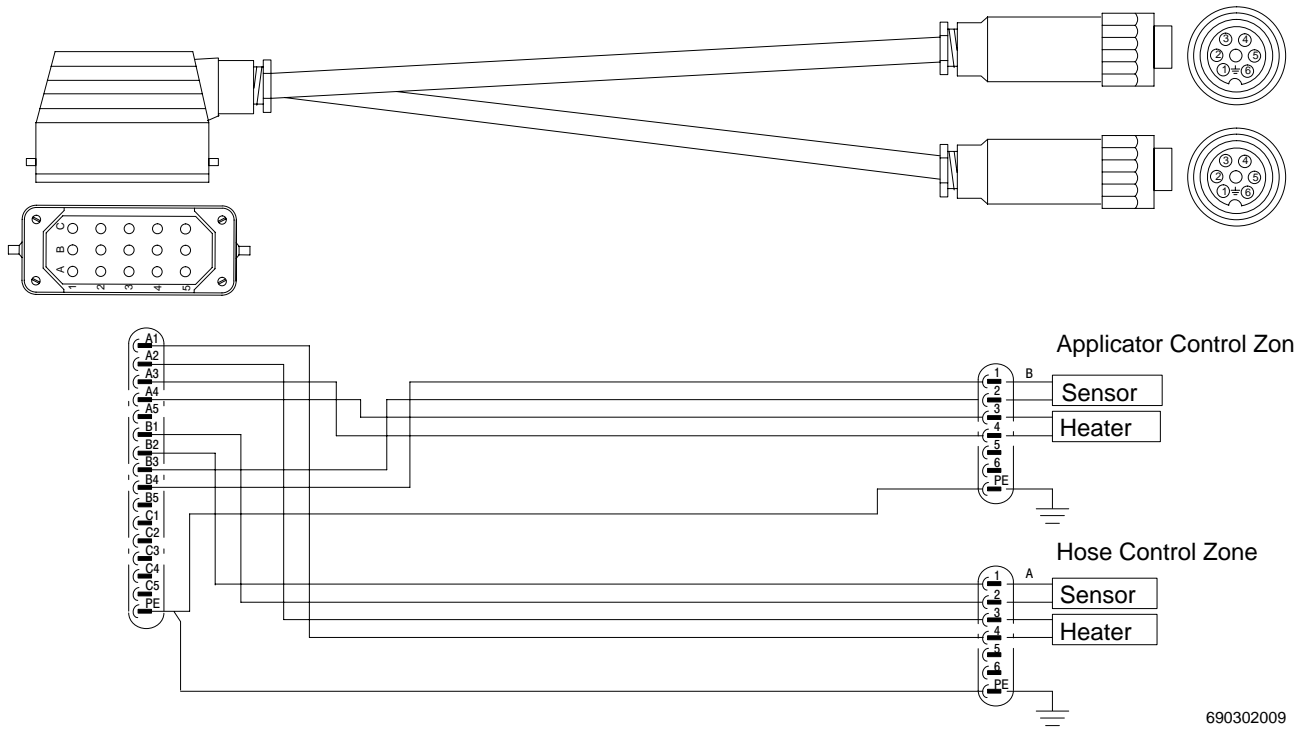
M-style splitter cable (two heated air manifold cordsets) wiring diagram
